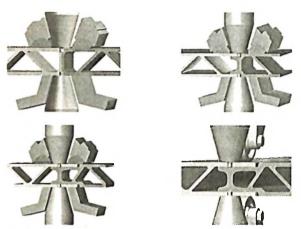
Designs suitable for friction stir welding of 2-skin profiles in aluminium. Illustration: ESAB
